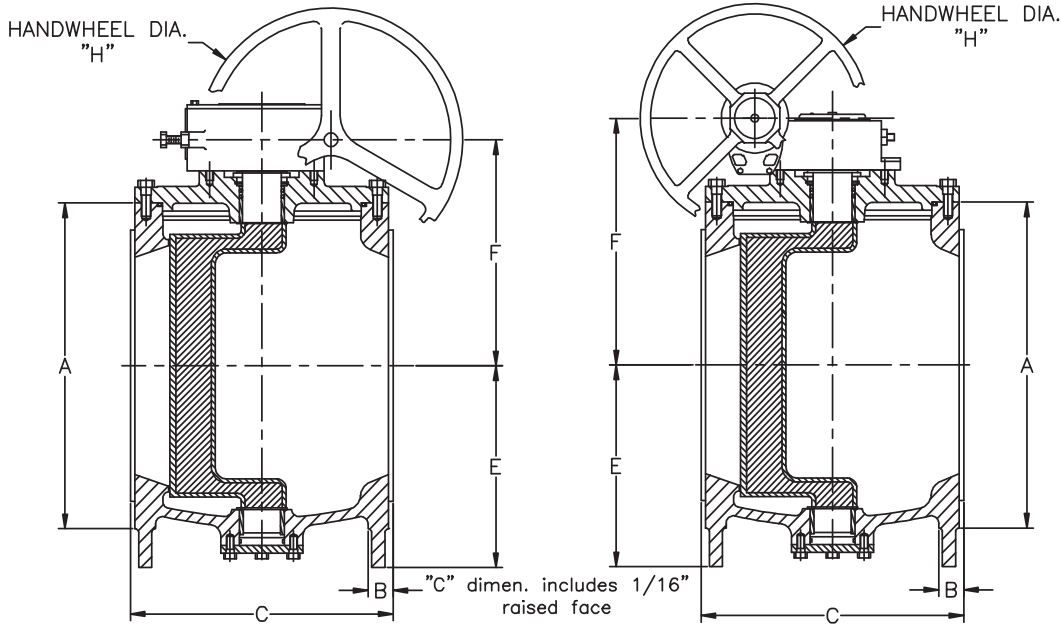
Class 250 Flanged End 2½" – 12", 400 PSI, 14" – 36", 300 PSI
